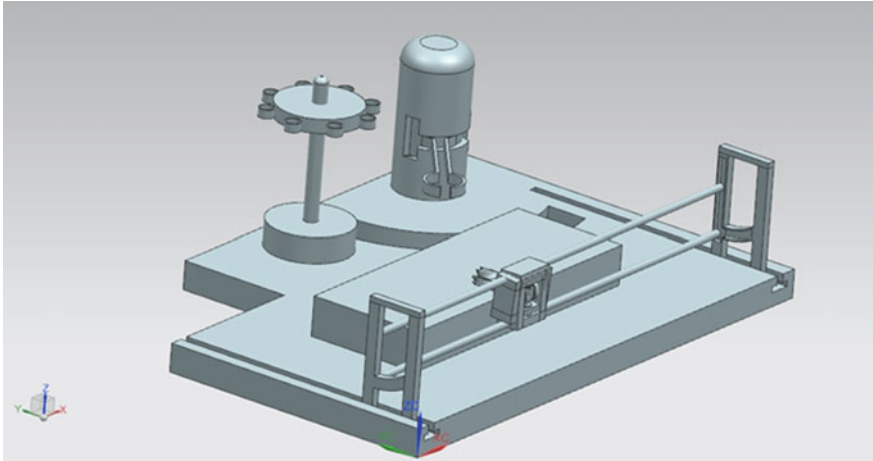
Proposed configuration for milling using multipurpose cutting assembly
